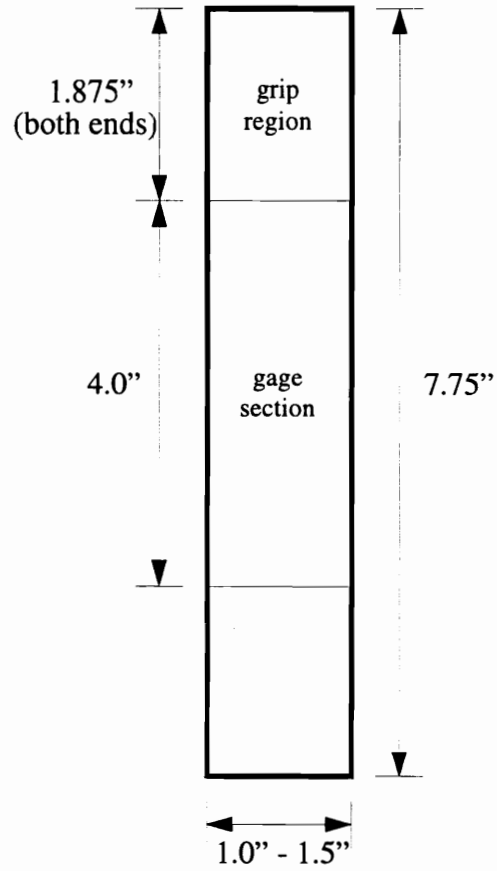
Specimen Dimensions for Static Tension Testing
